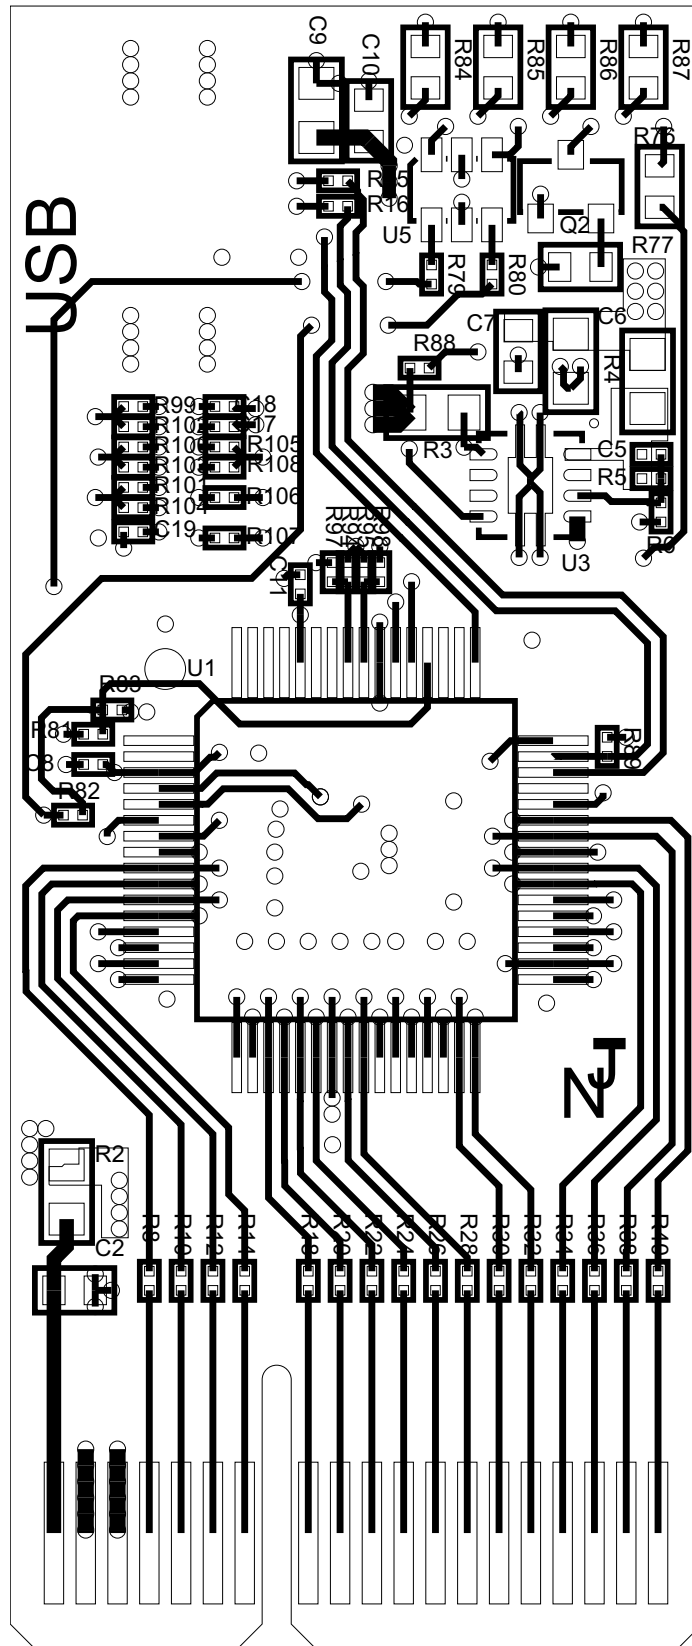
TLK10232 EVM USB Dongle Board Layout, Bottom Signal (Layer 4 Top View)
